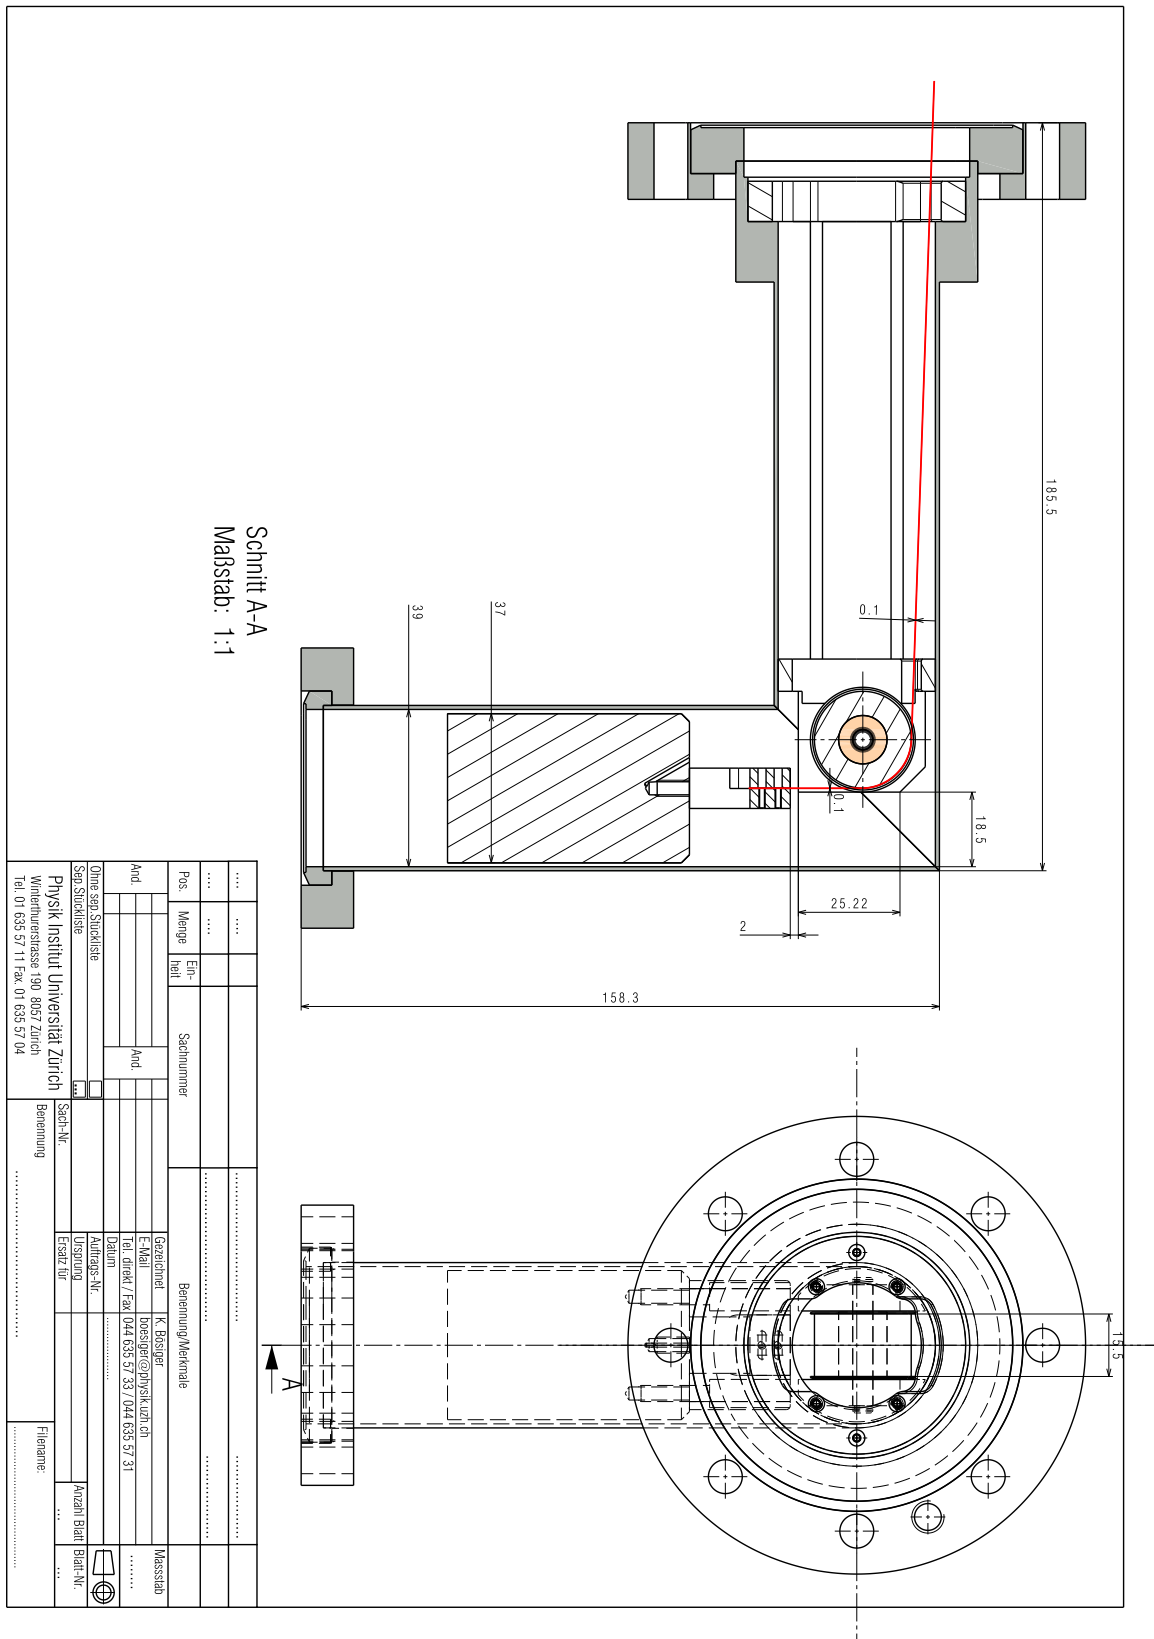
Technical drawing of the slide-in module designed for the intermediate calibration system. Drawing provided by Kurt Bösiger, UZH.
